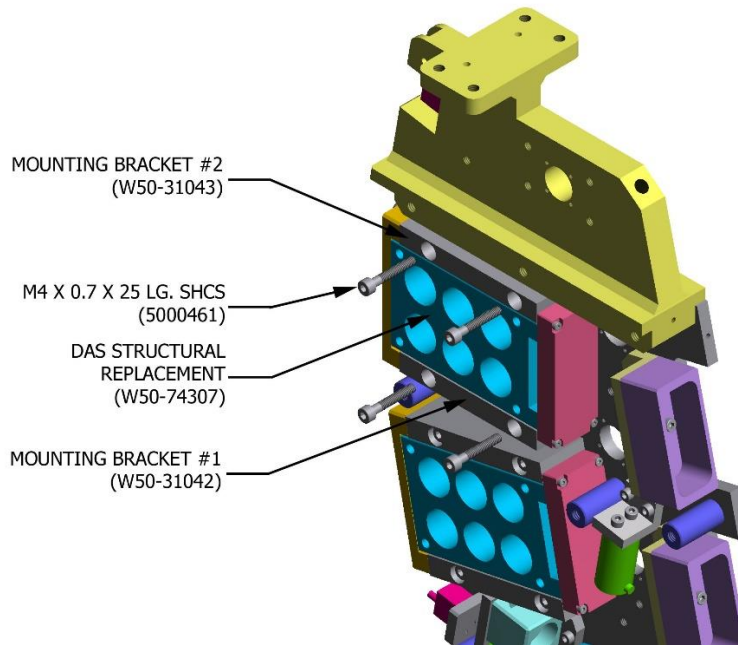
Removing the M4 X 0.7 X 25 LG. SHCS on the mounting brackets #2 and #1.
